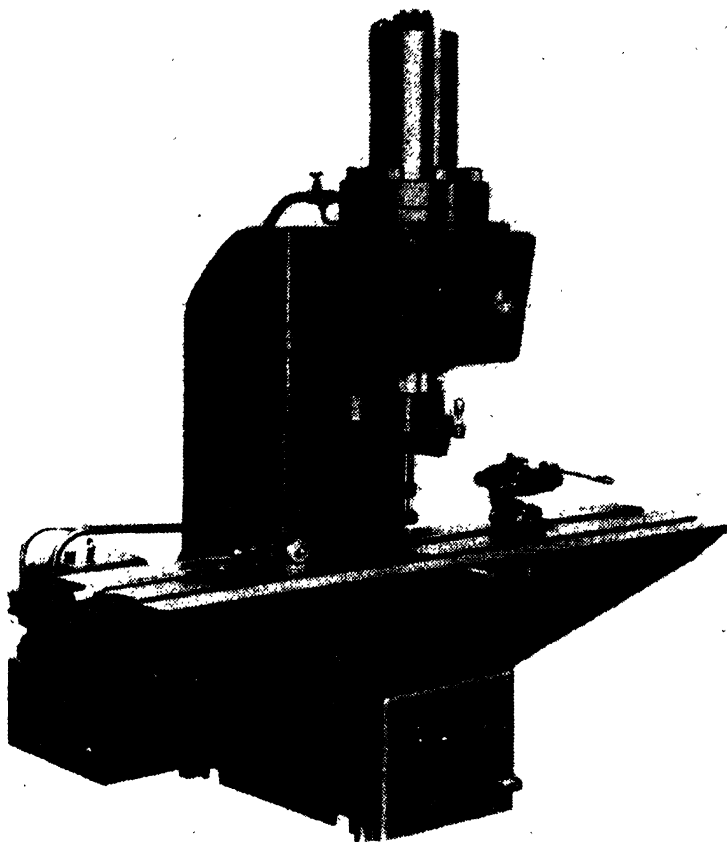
Oilgear gooseneck-type straightening press. (*The Oilgear Co., Milwaukee, Wis.*)
